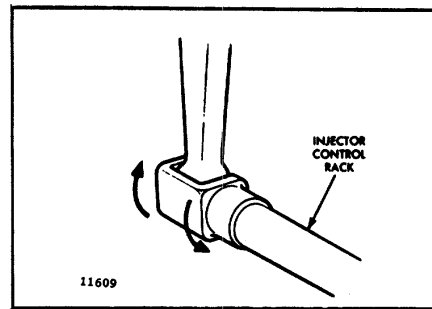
Checking Rotating Movement of the Injector Control Rack
